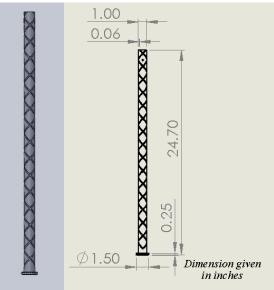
CAD MODEL OF PROPOSED THREADED ROD
